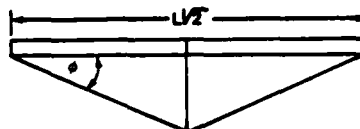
B. Side View, 45°, Showing the Addition of Material to the Top Surface for Thread Depth for Bolting Test Specimens to Platen
